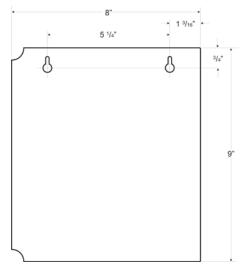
ARB-96x List 1E Wall Mounting Dimensions
